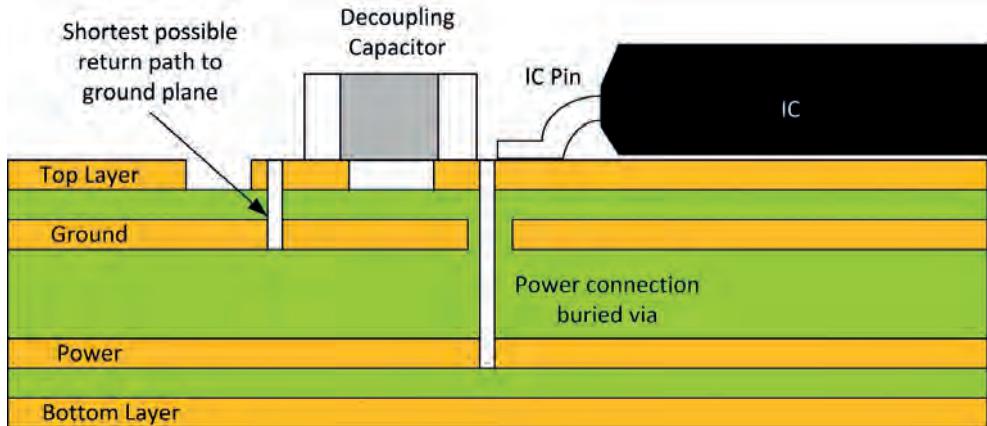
shortest possible ground via connection due to optimum PCB layer stackup
